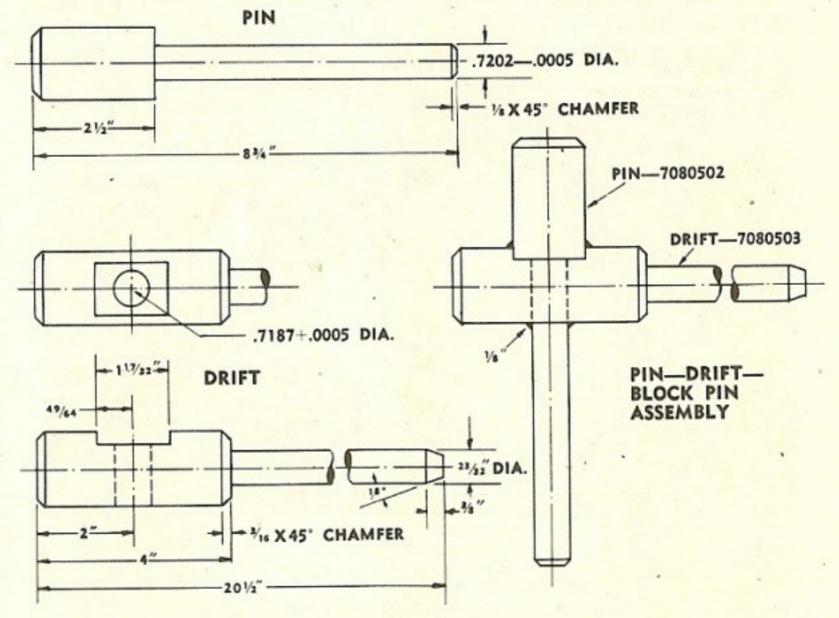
Your shop mechanic will be glad to make this pin puncher—if you bribe him with a brew or two.
